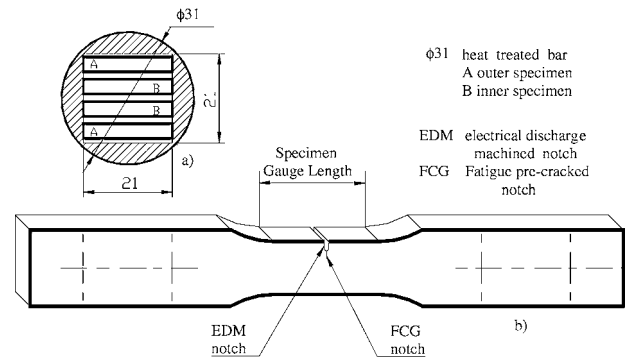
(a) Specimen preparation and (b) Specimen geometry for FCG tests.
